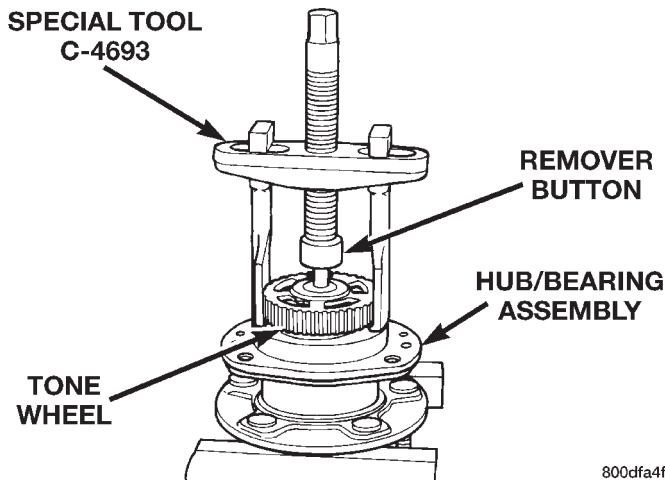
Tone Wheel Removal From Hub/Bearing Assembly
